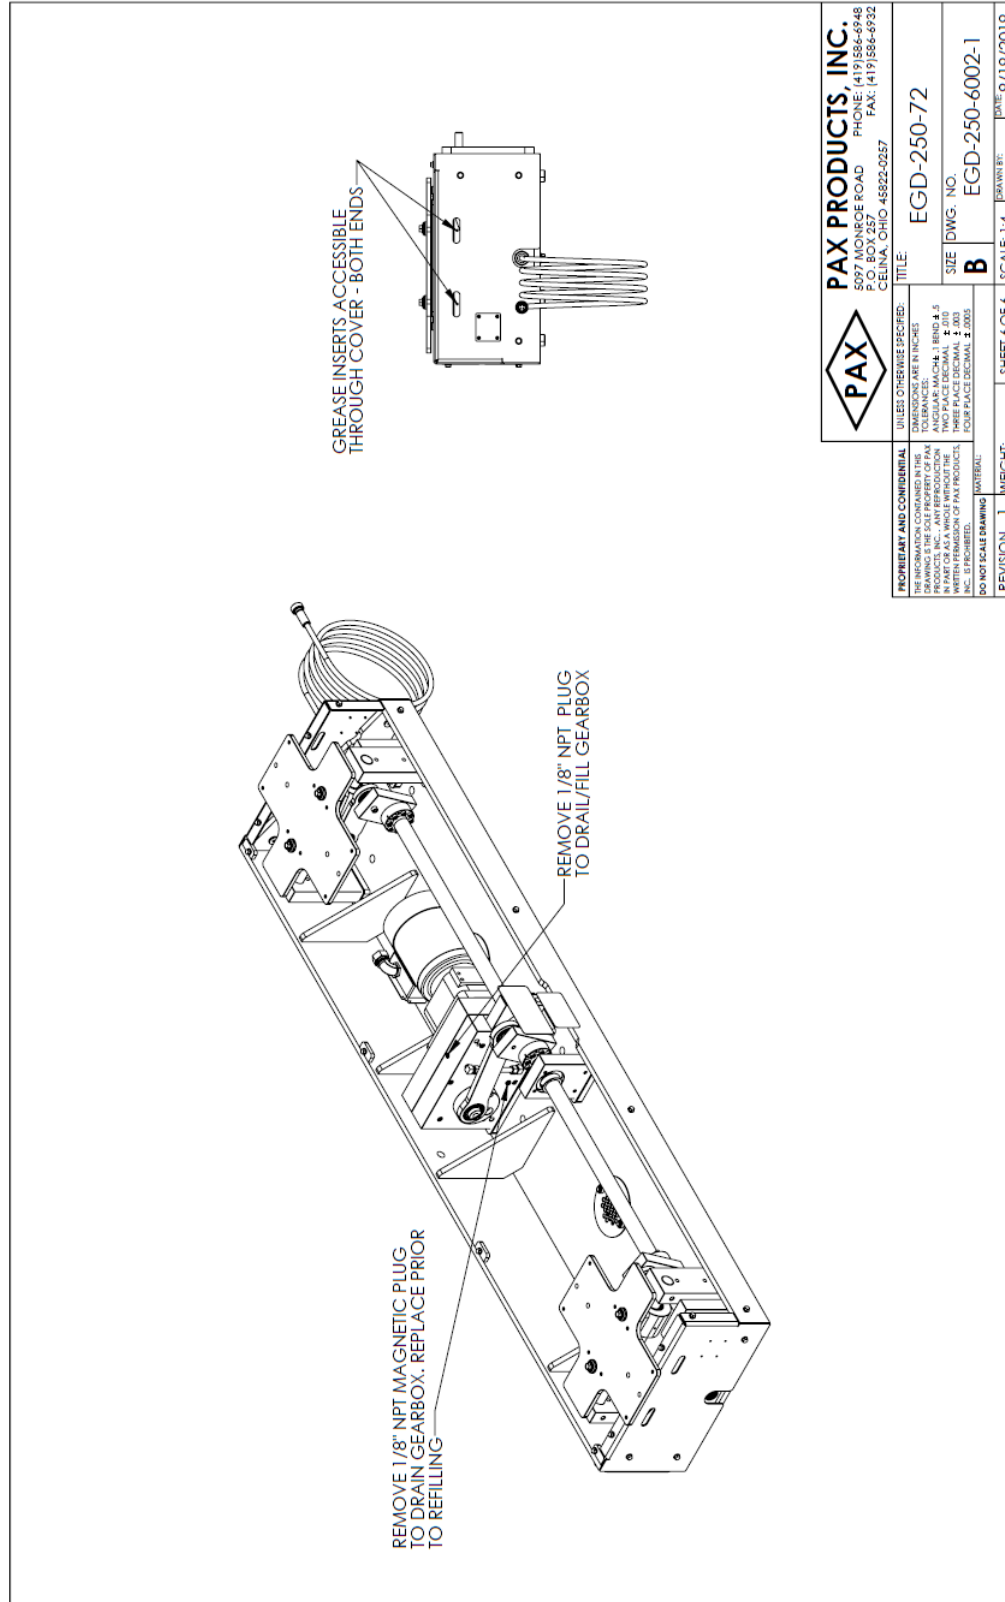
INSTRUCTIONS FOR LUBRICATING THE LINEAR BEARINGS
